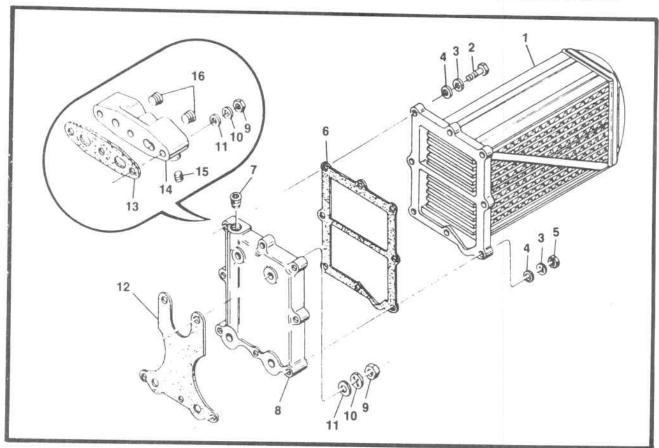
B. OIL COOLER MODELS IO-470-C,E,G,H,J,K,N,R,S.
